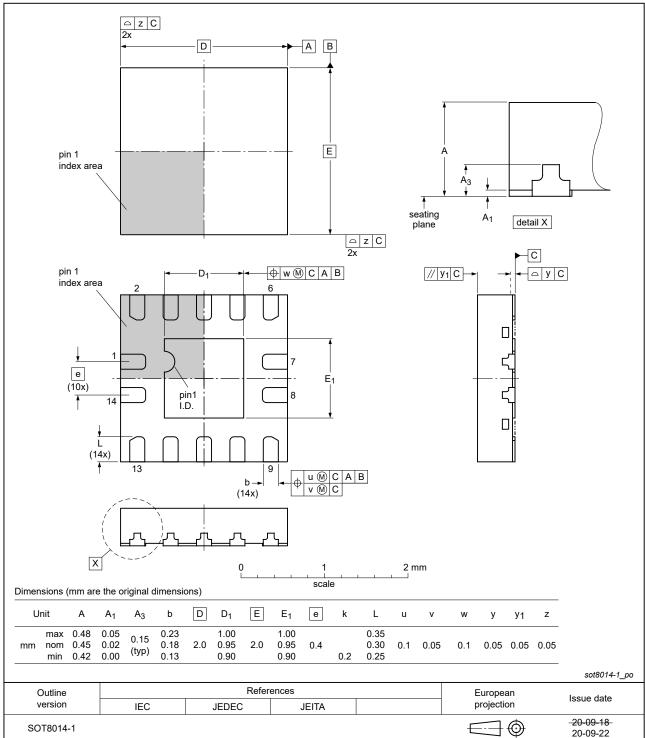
Package outline SOT8014-1 (DHXQFN14)
